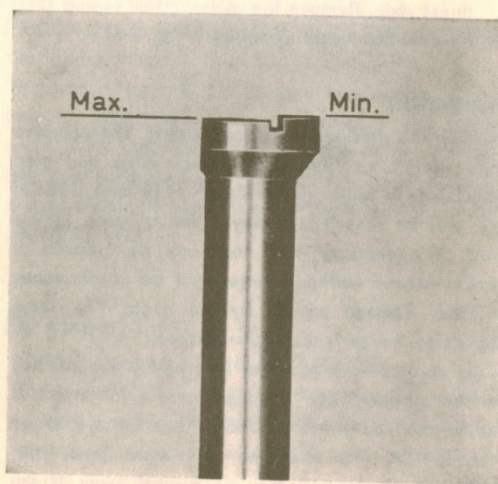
Measuring gauge with tolerance positions
